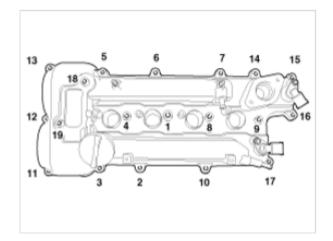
Identifying Cylinder Head Cover Bolts Tightening Sequence Courtesy of HYUNDAI MOTOR AMERICA
